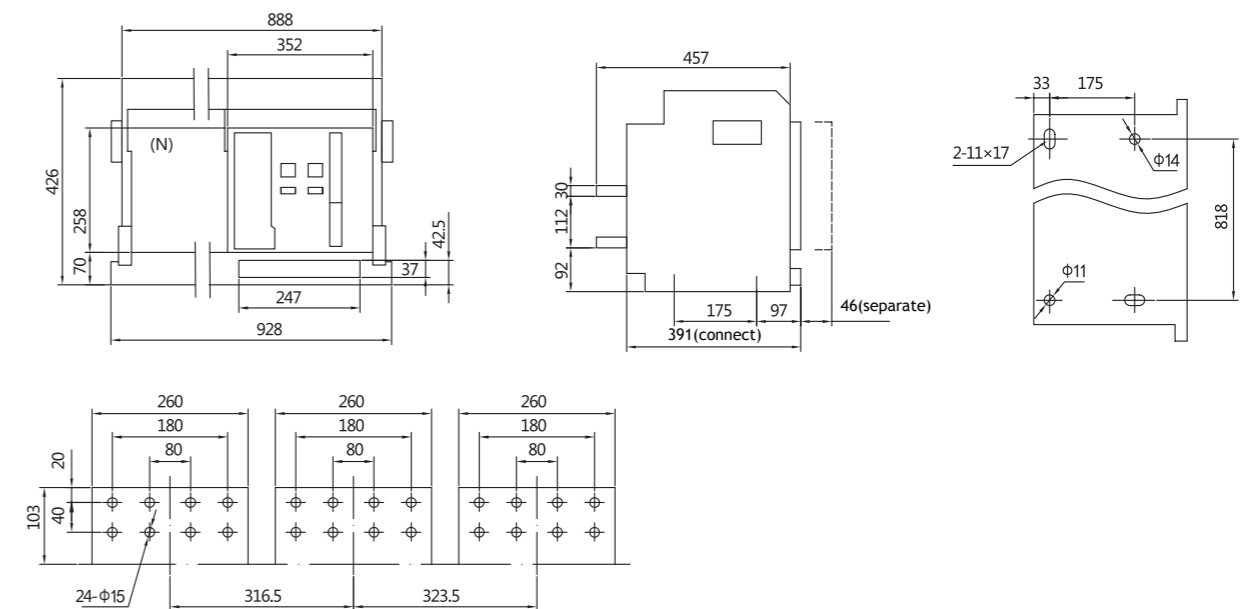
RDSW6-6300/3P (In=6300A)drawer type install and shape dimension
